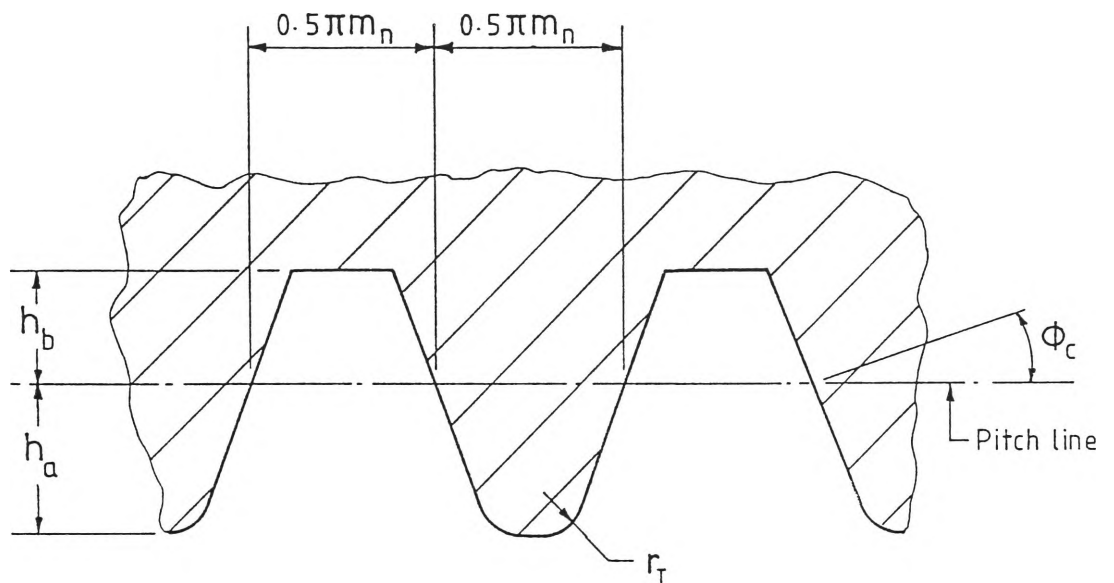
A - BASIC CUTTING TOOL DEFINITIONS
